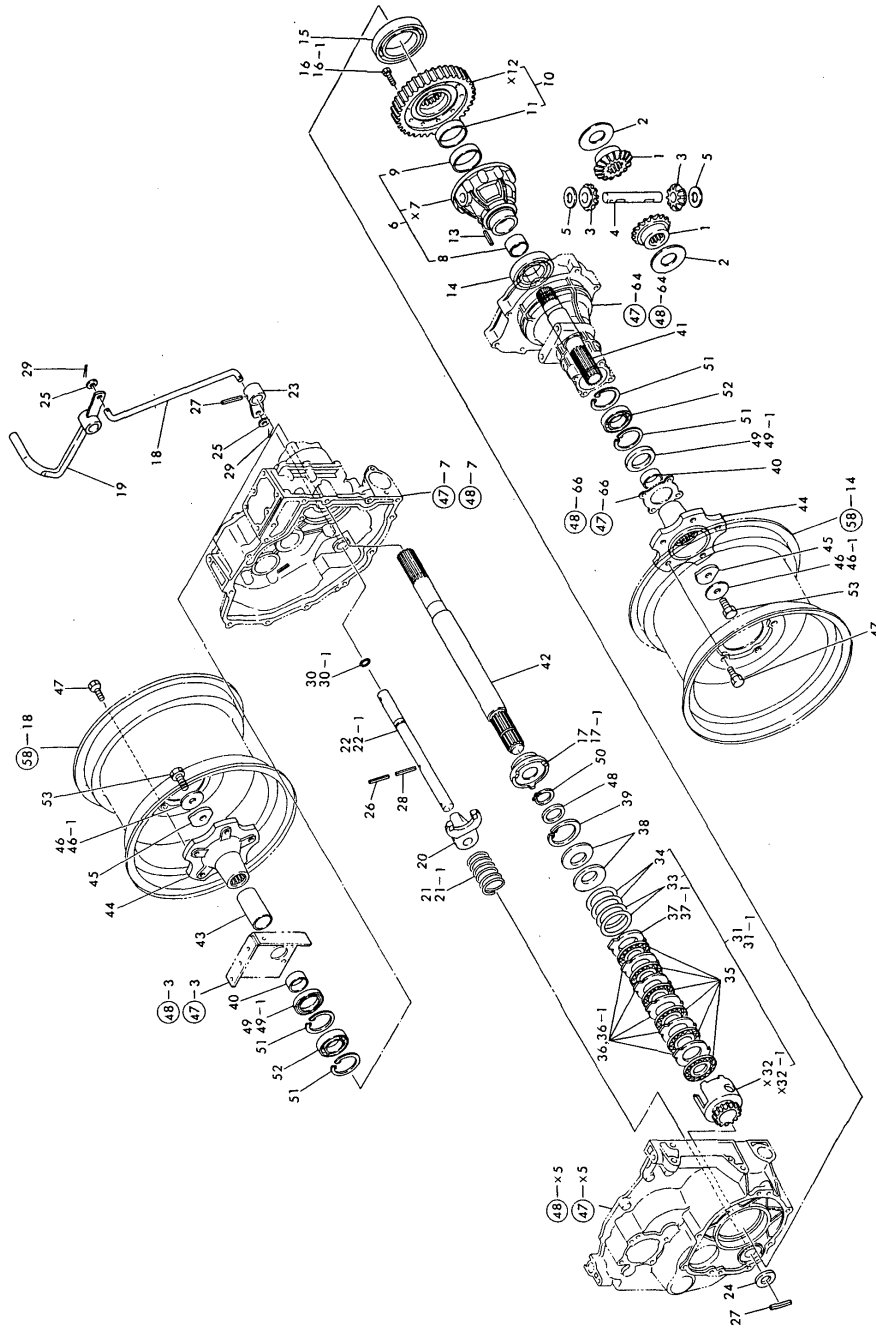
DIFFERENTIAL GEARS & REAR AXLE SHAFT
